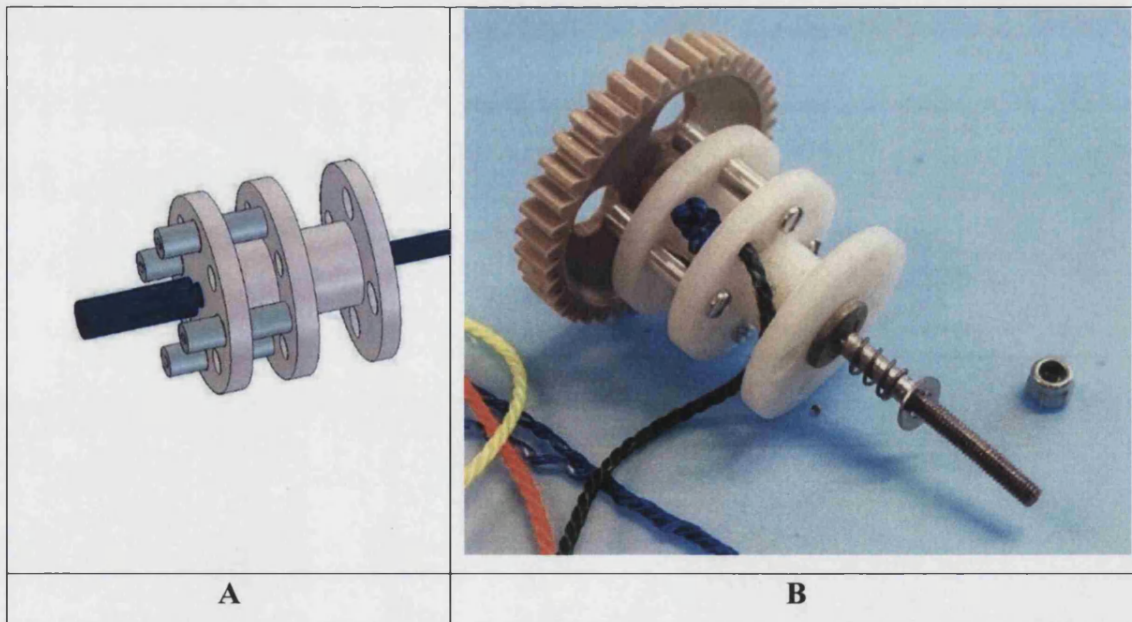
A – Rendering of an assembly drawing showing how the capstan sits on a stepped shaft, and how the four aluminium drive rods are located in an additional wall to prevent skew. B – Photograph showing how additional holes in the capstan walls make it possible to secure these rods, which have a tapped internal thread, using M2 screws. The location of these drive rods into holes in a driven gear, which sits adjacent on the wider section of the stepped shaft, enable the capstan to wind in a cord, (shown as secured by a large knot), and hence compress the robot. The circlip, compression spring and washer which normally hold the capstan located in the drive gear are also shown.
